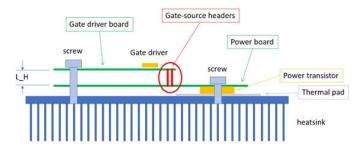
Cross section of the assembled prototype, which is mounted on the heatsink.
